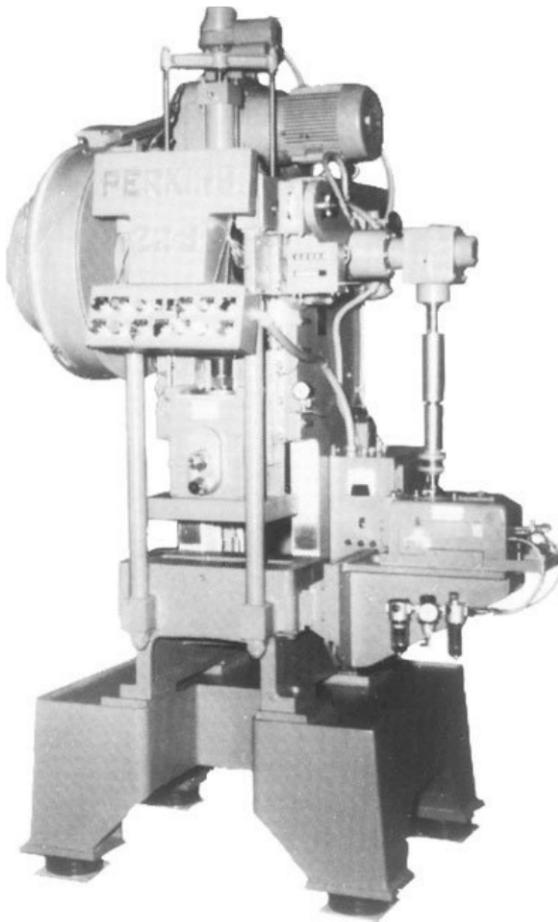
High-speed punch press mounted on pneumatic rubber mounts. (Courtesy of *Sound and Vibration*.)
